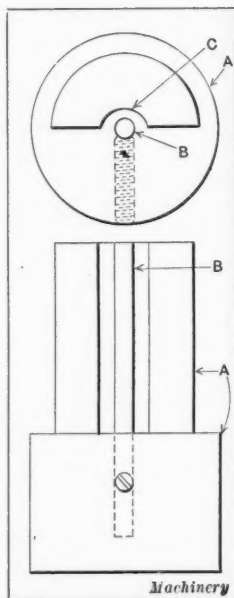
Piercing and Trimming Die used for finishing Ends of Saw Blade Blanks
